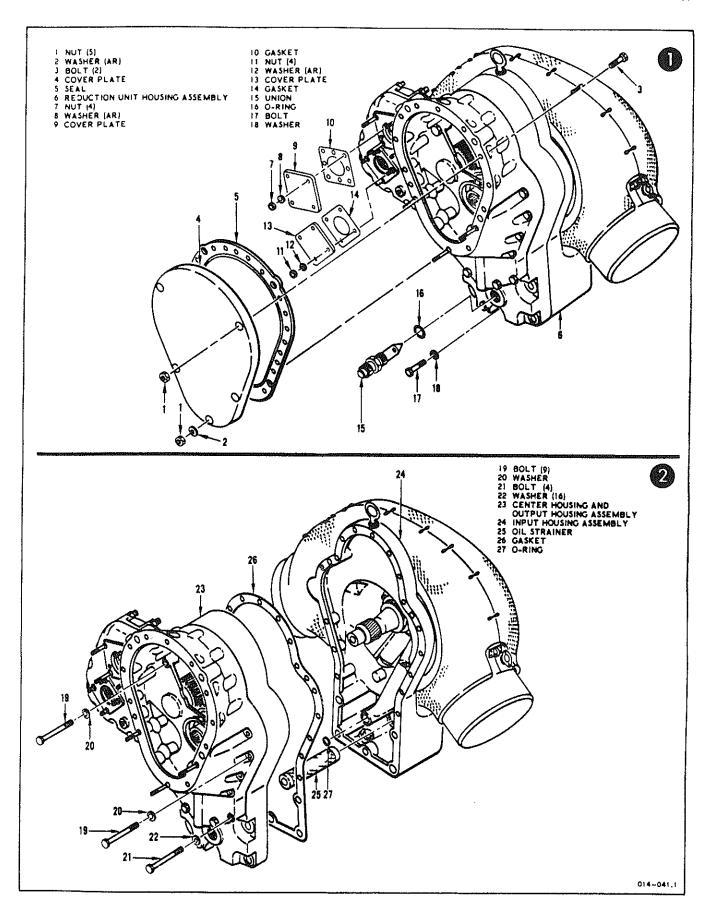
Reduction Unit, Exploded View (Sheet 1 of 3)
